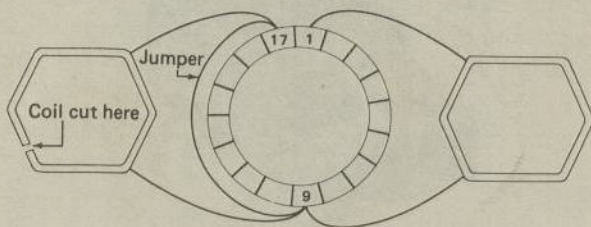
Cutting out a shorted coil on a wave winding.
